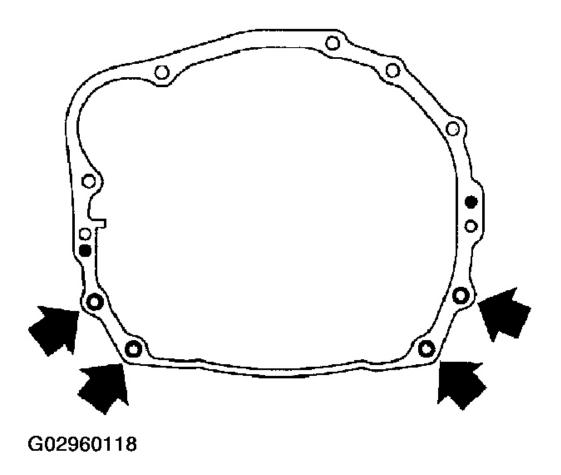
Tightening Nuts Holding Lower Side Of Transmission To Engine Courtesy of SUBARU OF AMERICA, INC.
